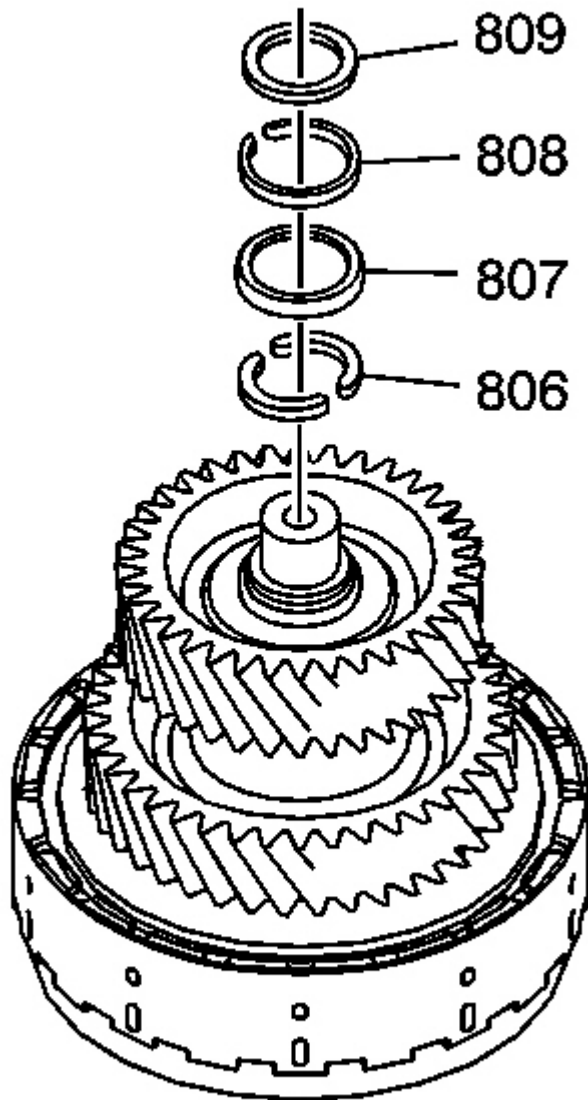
3rd Driven Gear Retaining Ring & Cap Removed
